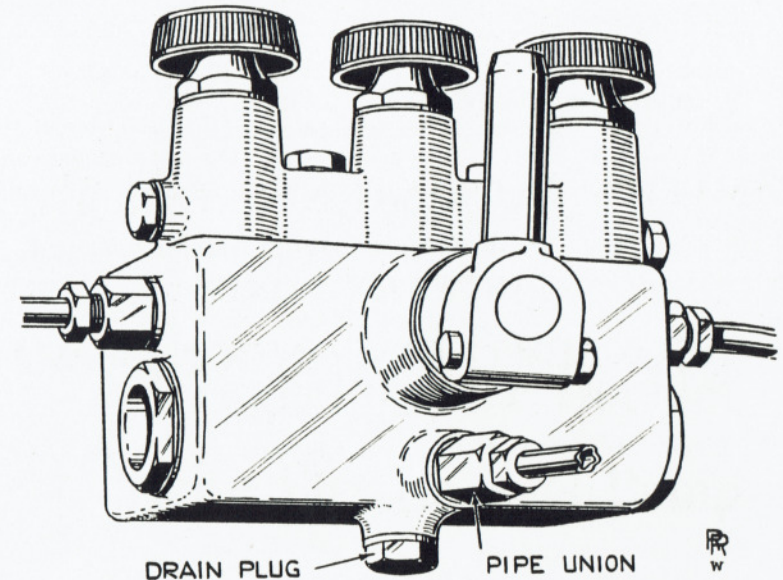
VIEW OF PUMP SHOWING DRAIN PLUG AND PIPE UNION.
